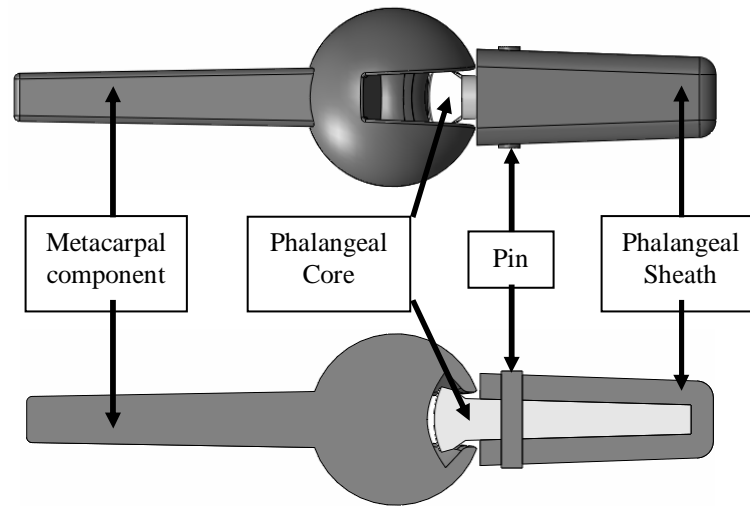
An external (top) and cross-sectional (bottom) view of the assembled implant.
